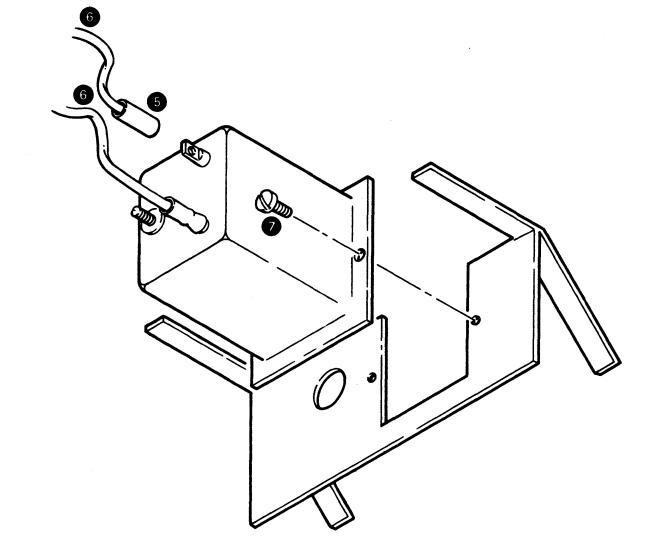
Usege Meter Card (Part 372688) Removal and Replacement
